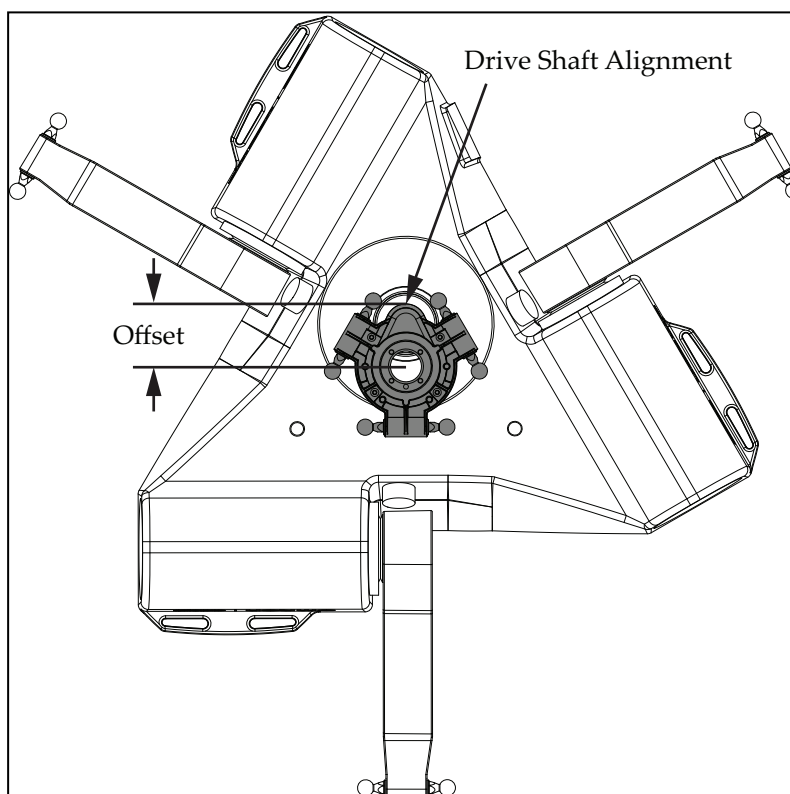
Platform Drive Shaft Alignment (Bottom View)
